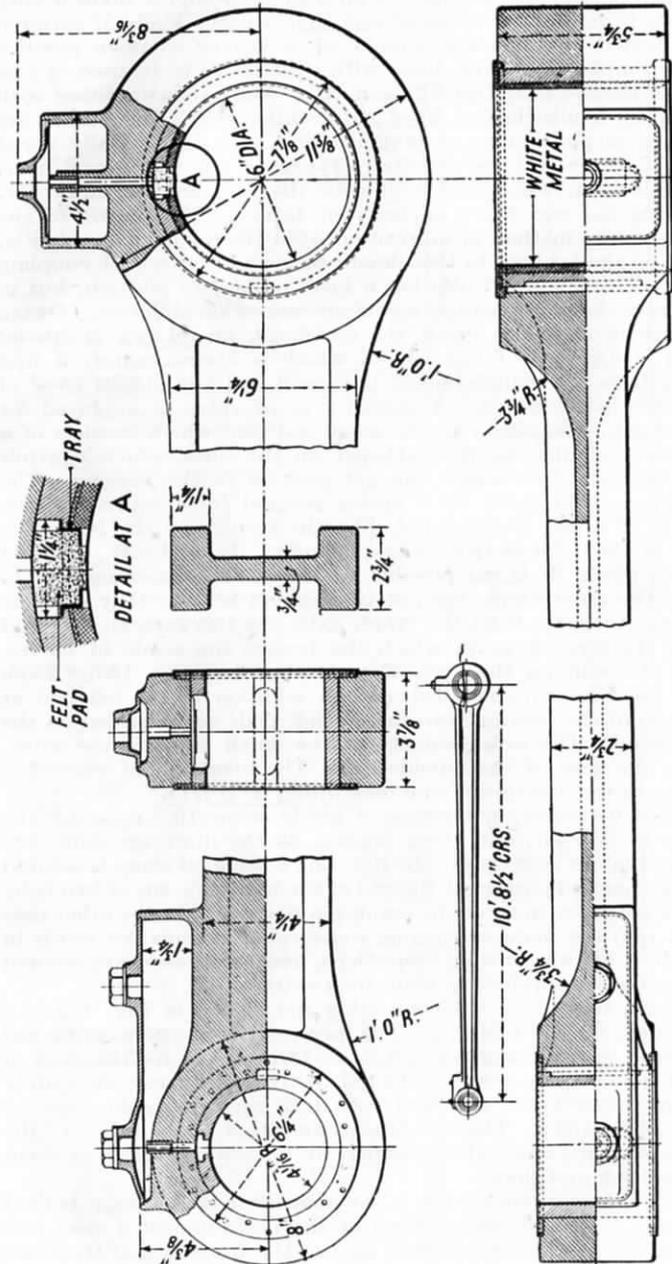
OUTSIDE CONNECTING ROD, G.W.R.
